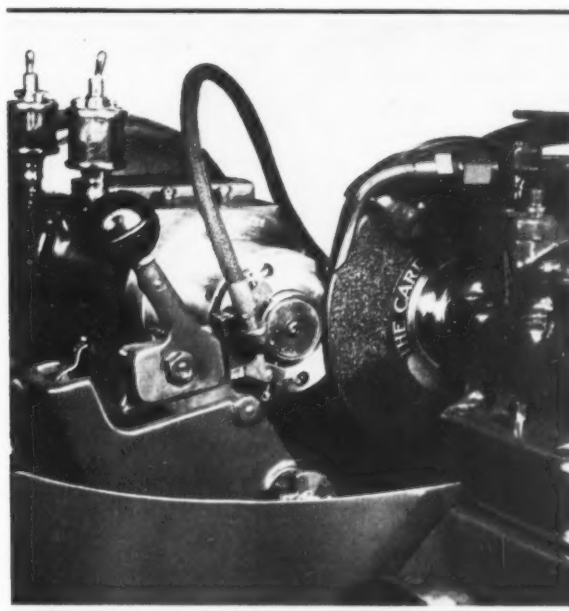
The Landis-Solex Sizing Device Enables Grinding to within 0.0005 Inch
